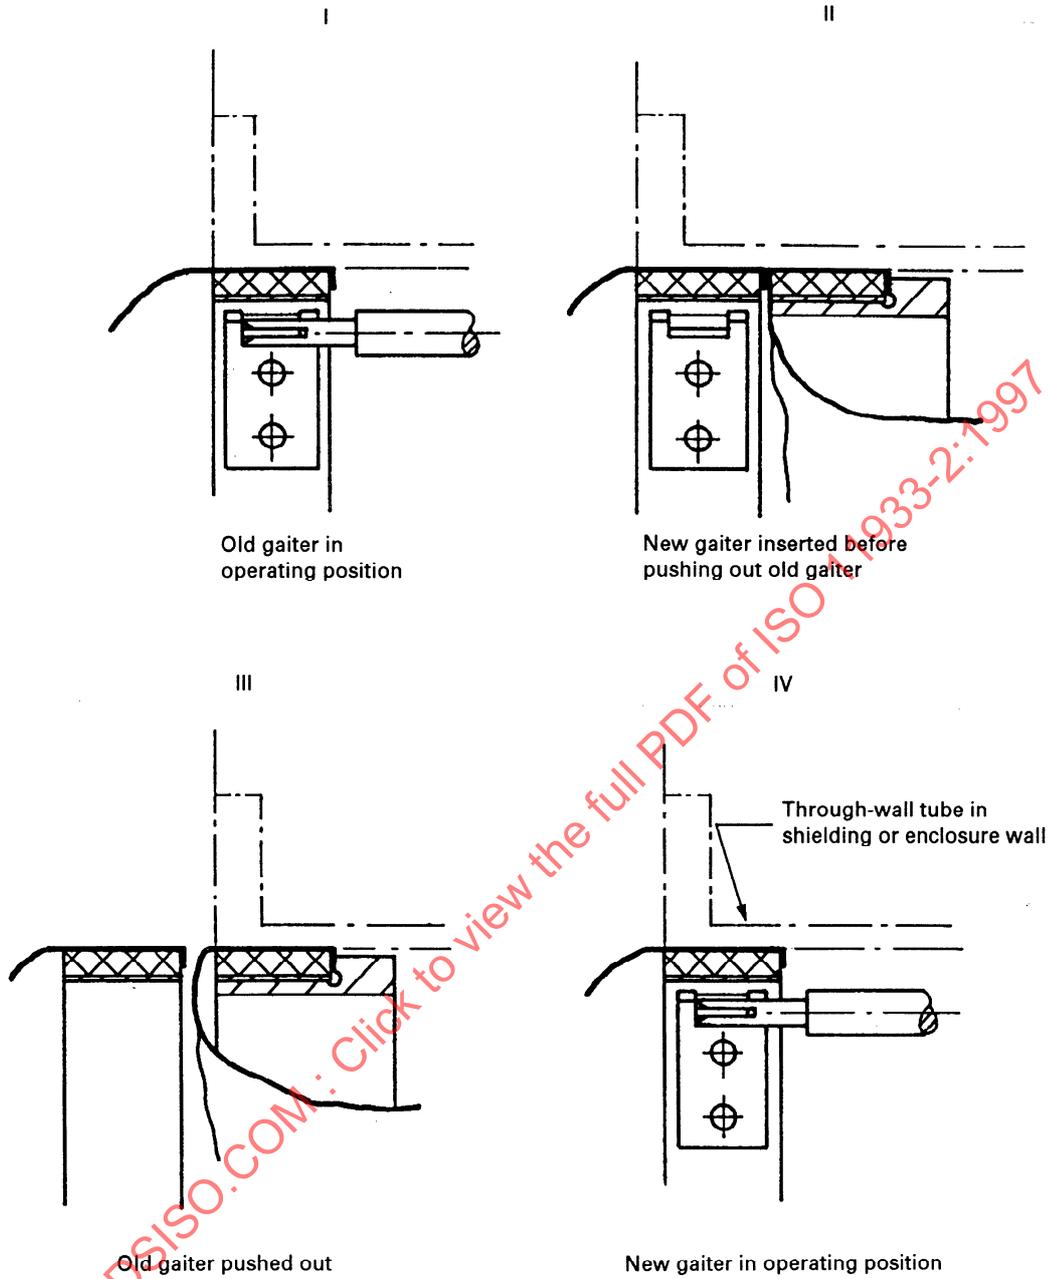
Changing a manipulator gaiter mounted on a type 3 support ring
